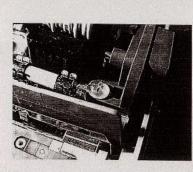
Concept SME-SMP Screw in a Product Assembly.
